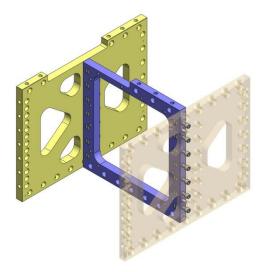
Partial assembly of Boxwork, showing screws threaded into Barrel Nuts.
